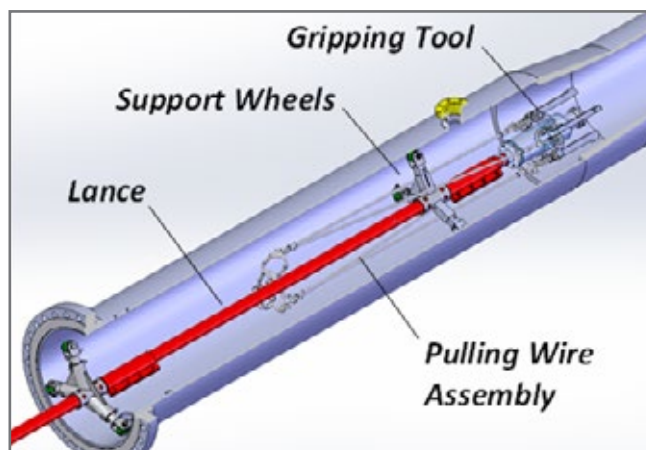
Lance with support and wheel assembly attached to gripping tool.
